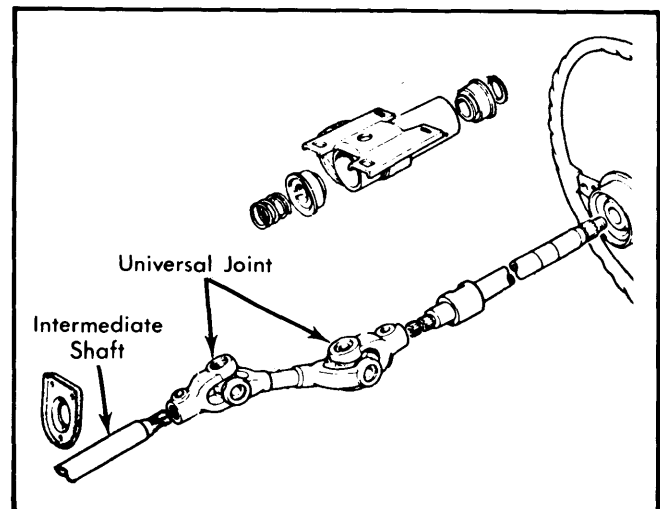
Detail of Flexible Coupling Connecting Upper and Lower Portions of Steering Shaft
